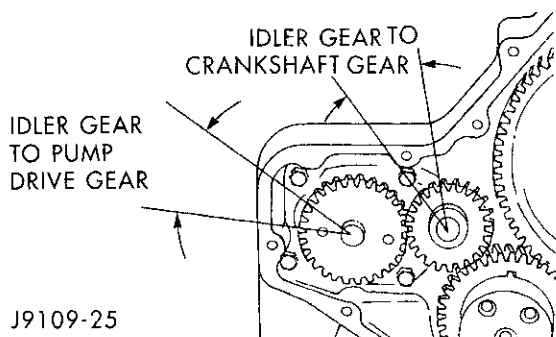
Idler Gear to Pump Drive Gear and Crankshaft Gear Backlash
